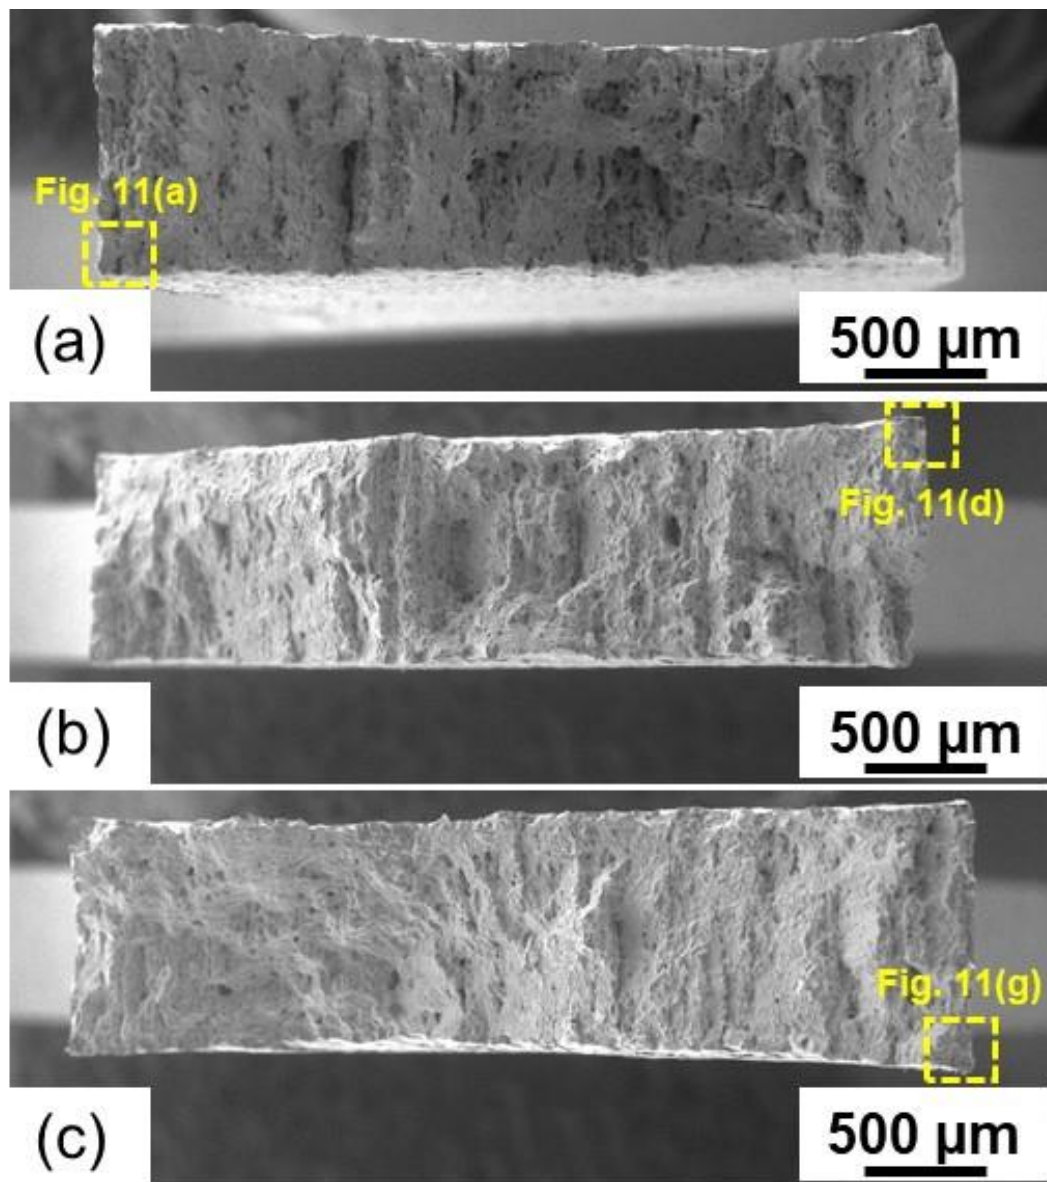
Overall view of the fracture surfaces for specimens (a) uncharged and hydrogen-charged at (b) 1 and (c) 10 A/m².
